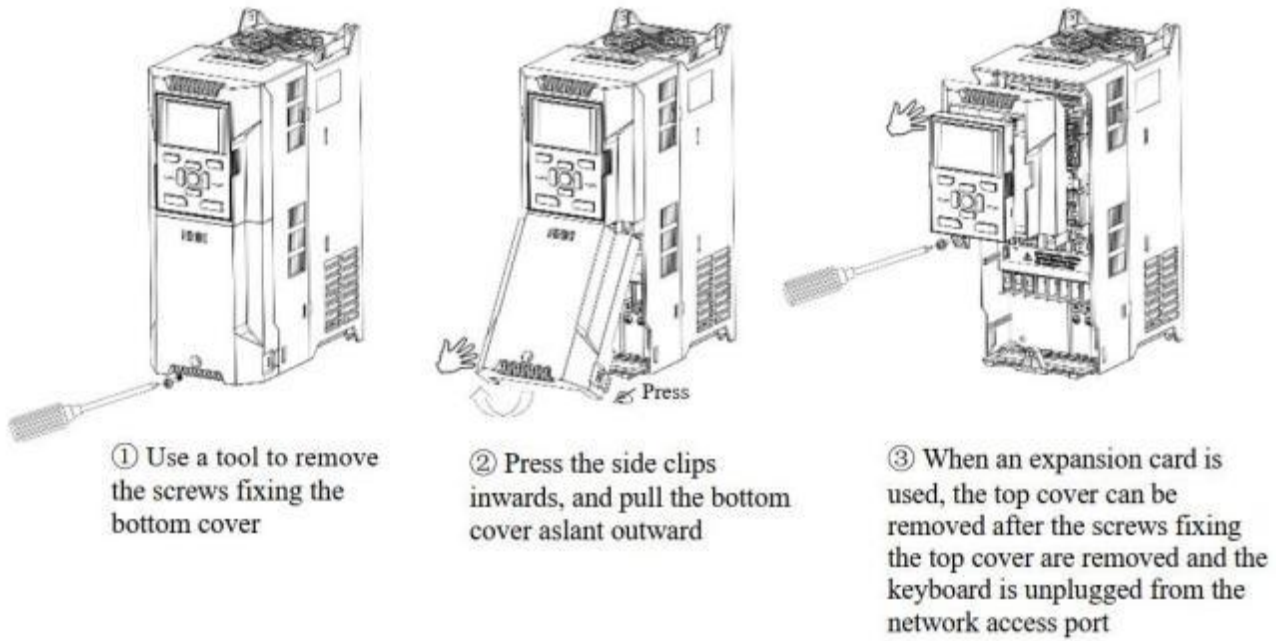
Illustration of 380V 0R7G/1R5P~022G/030P panel removal
